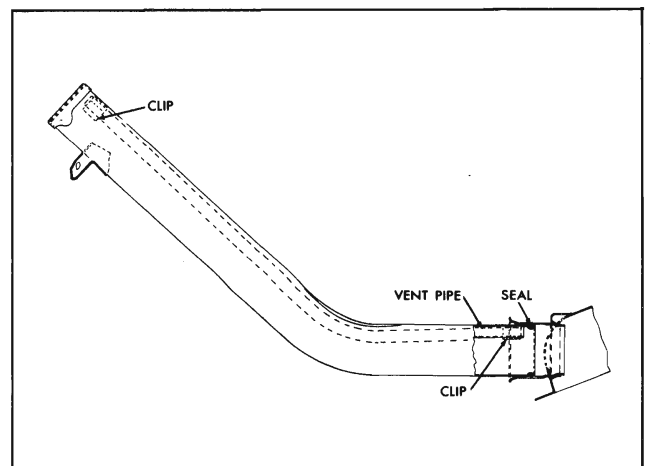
Fuel Filler Pipe Positioned in Tank
